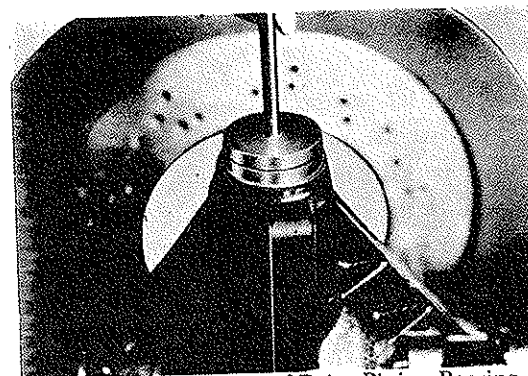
Press-Fitting of Drive Pinion Bearing Cup (Propeller Shaft Side)
